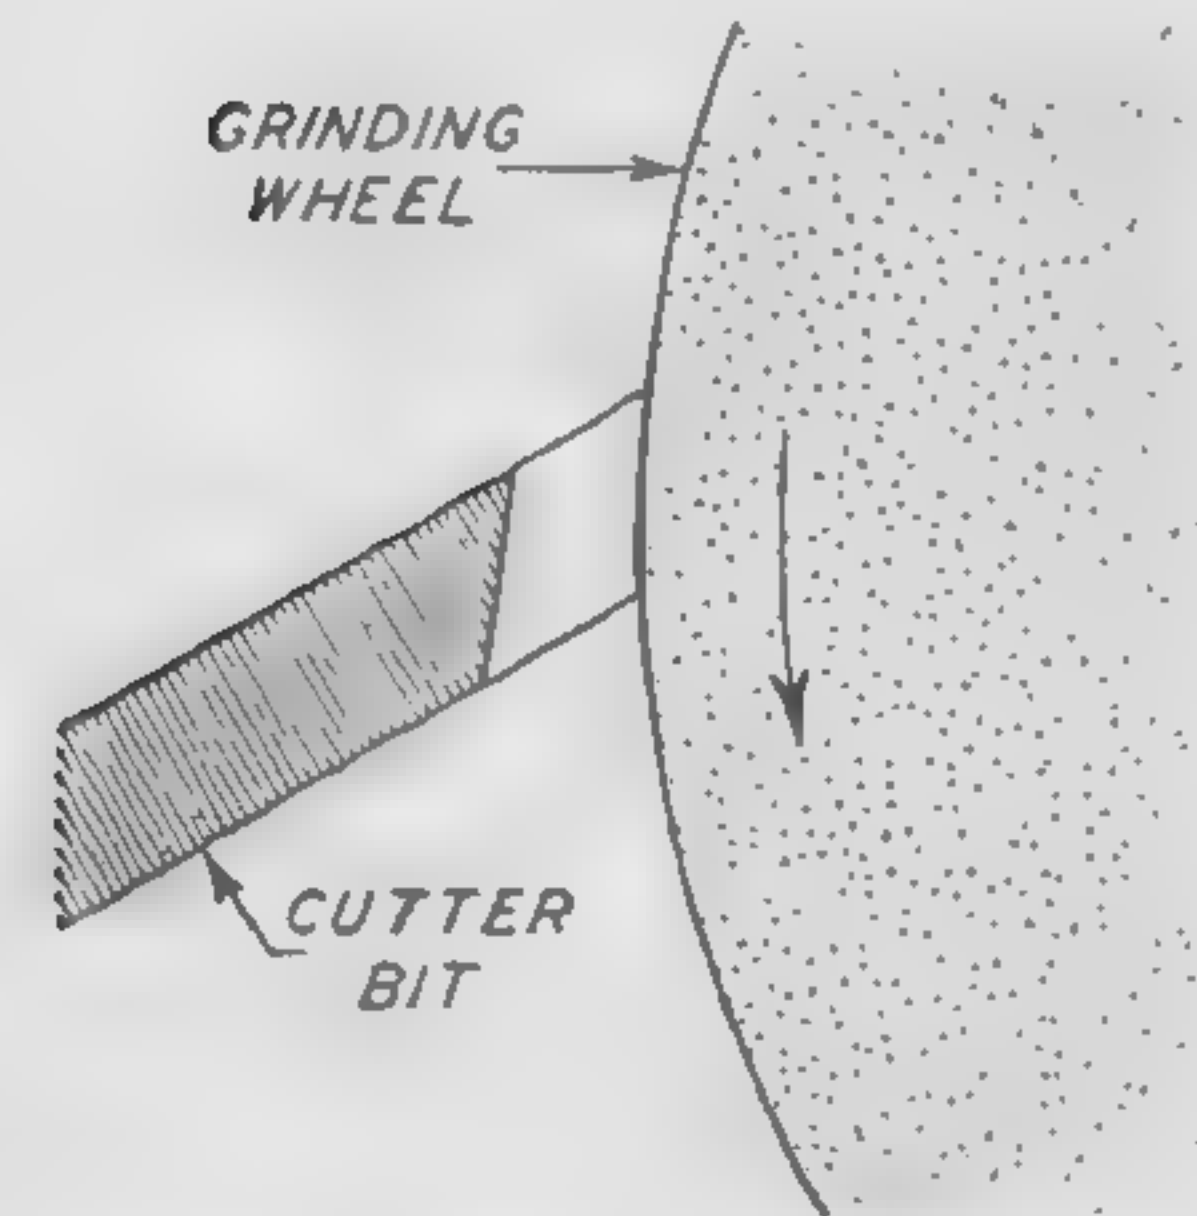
Step 4—Grinding the Lathe Tool for Front Clearance
